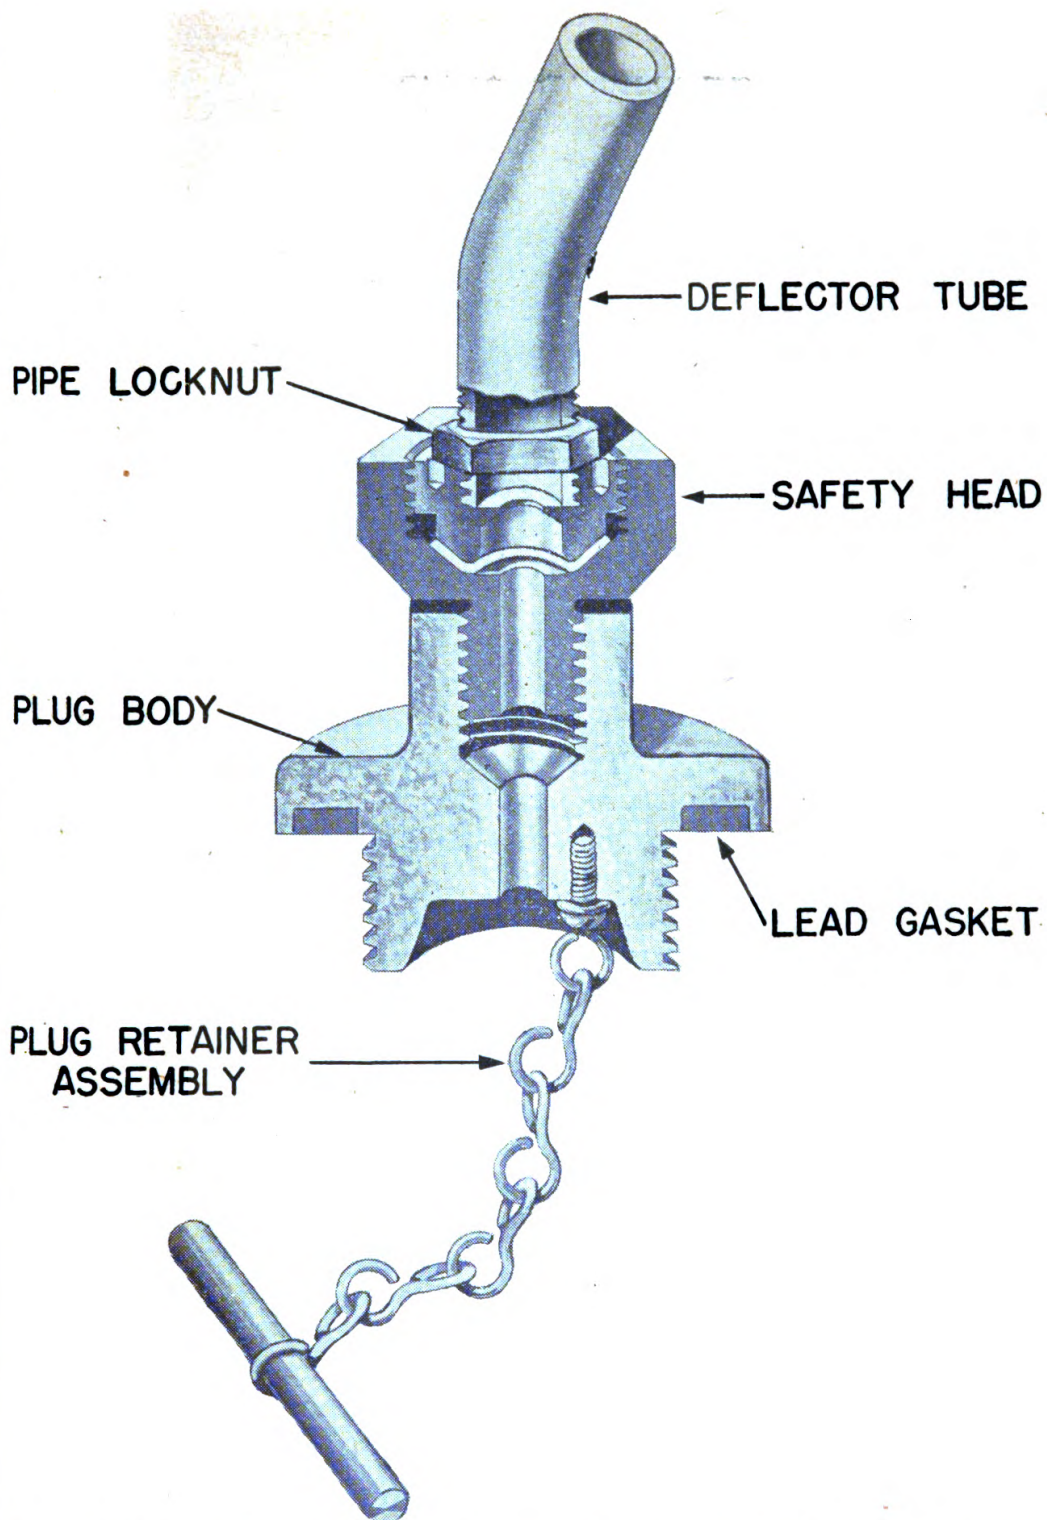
Fuel Tank Plug Assembly (cross section). Deflector tube must face to rear and at 45° angle to firer's left shoulder. Lock by tightening locknut with wrench.
